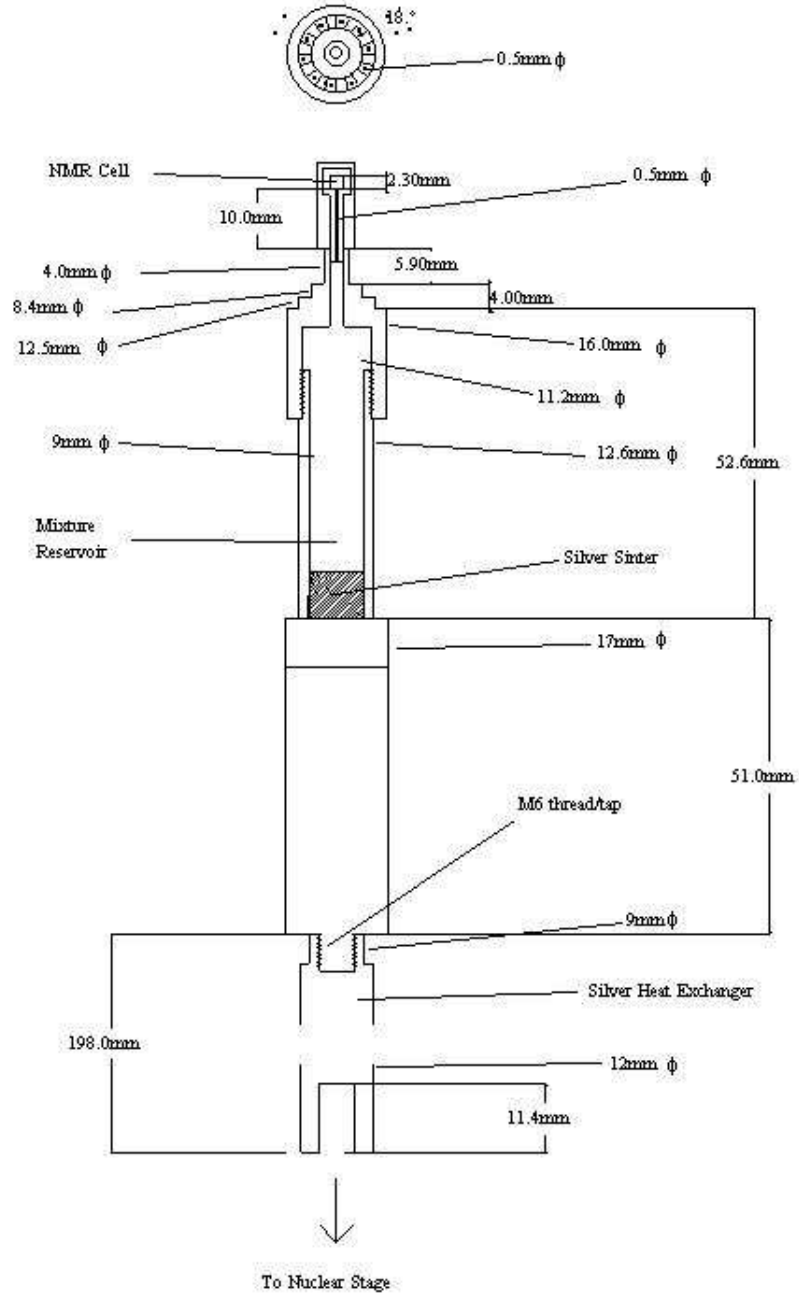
Dimensions of the experimental cell and heat exchanger
